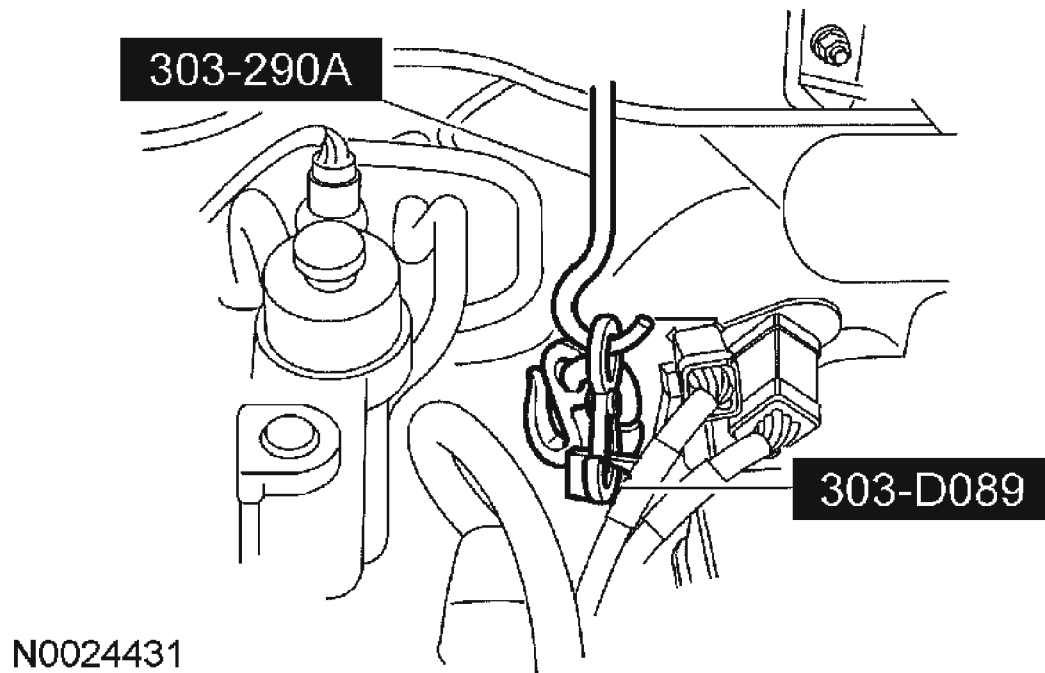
Disconnecting Electrical Connectors From Upper Intake To Gain Access To Engine
